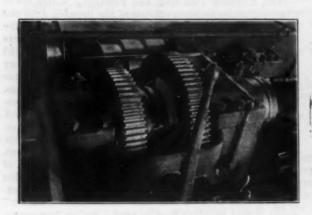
The Head with Cover Plate Removed, Exposing the Spindle Gears and Their Clutch.
